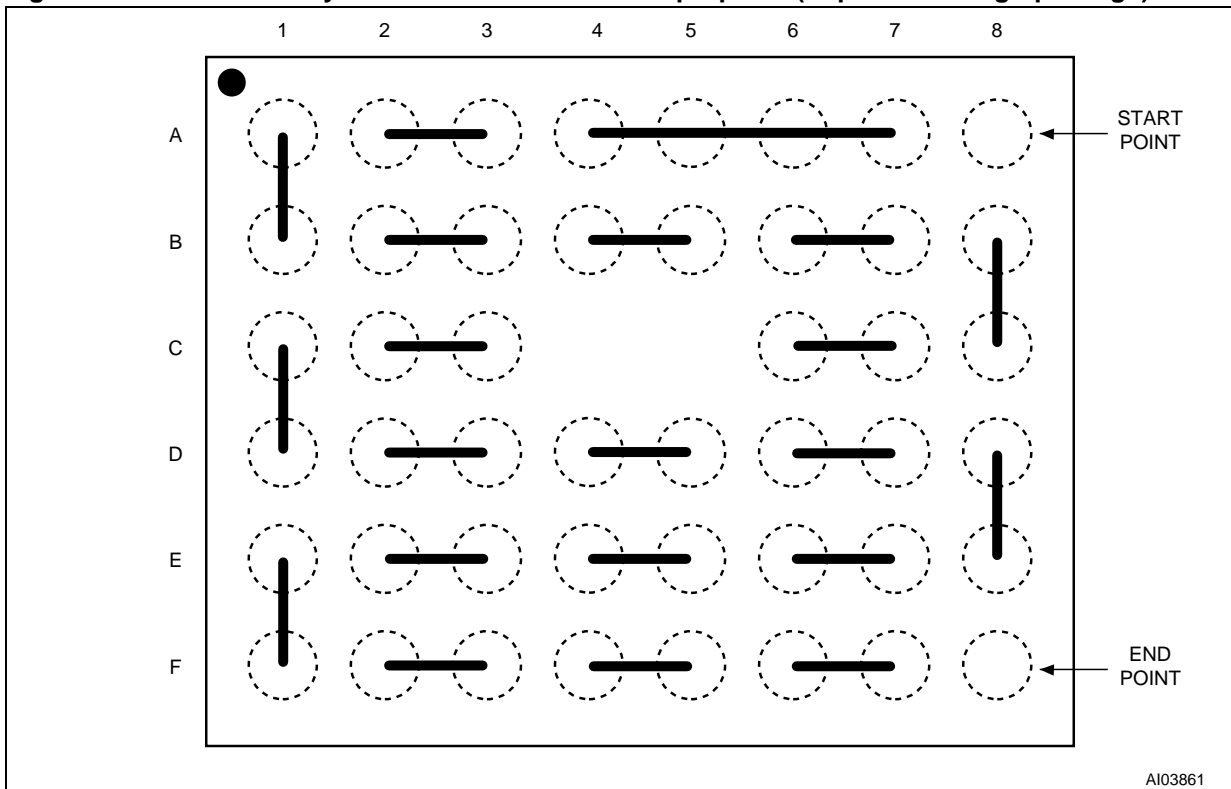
TFBGA46 Daisy Chain - PCB Connections proposal (Top view through package)
